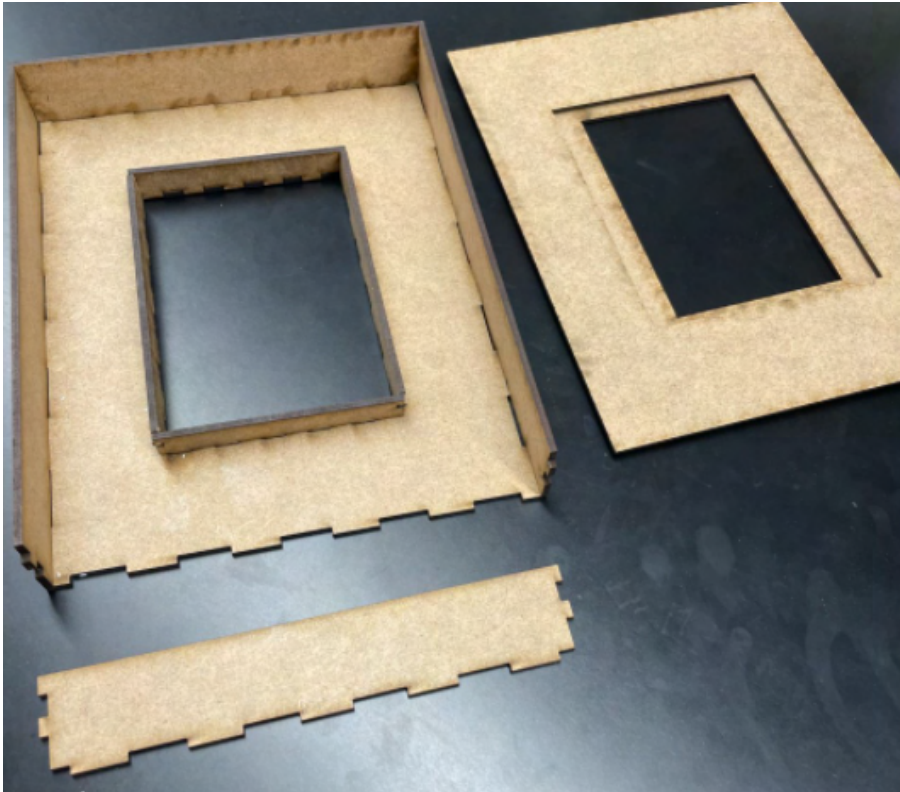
Photo of the laser cut HDF showing the parts being not completely assembled
